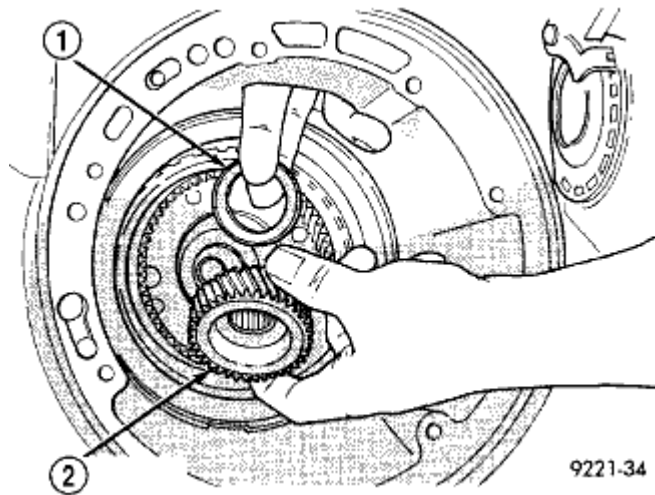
Rear Sun Gear & #7 Needle Bearing
